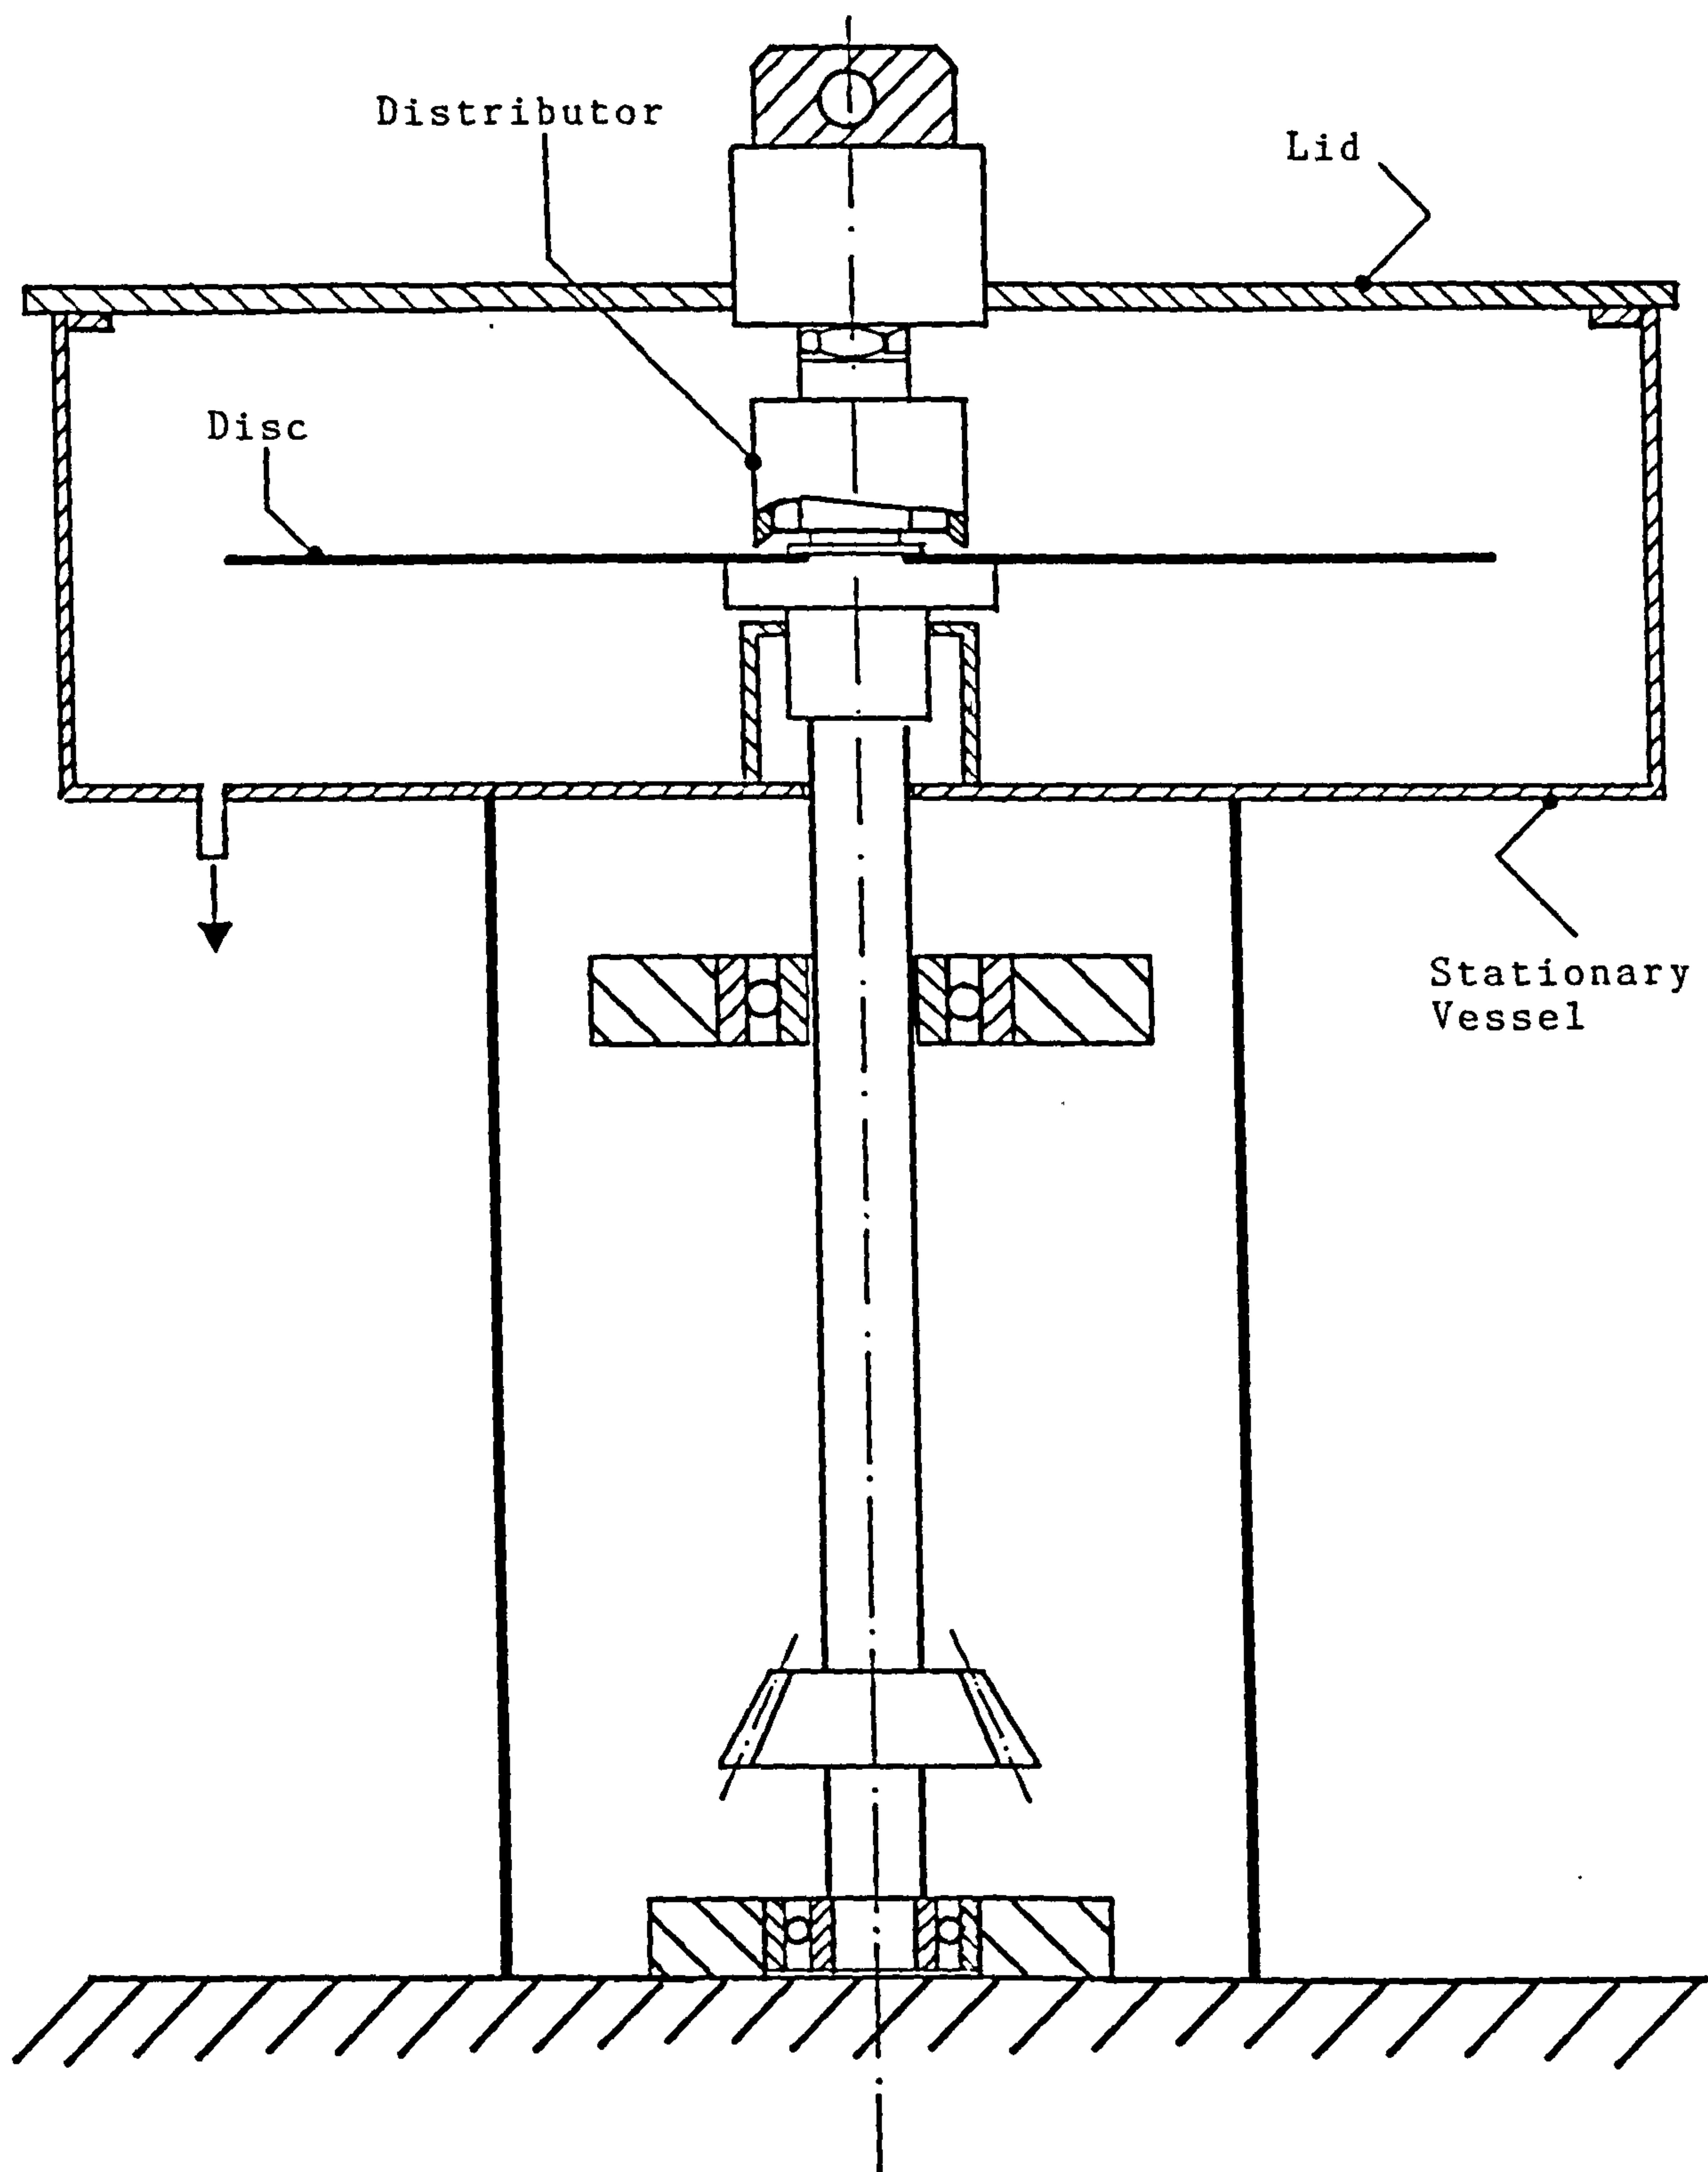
MECHANICAL DETAILS OF THE ROTATING DISC ASSEMBLY
